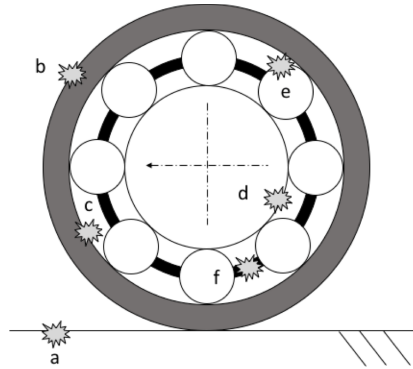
Ball bearing structure and possible damage locations: a) rail, b) external bearing, c) outer ring, d) inner ring, e) rolling element and f) cage.
